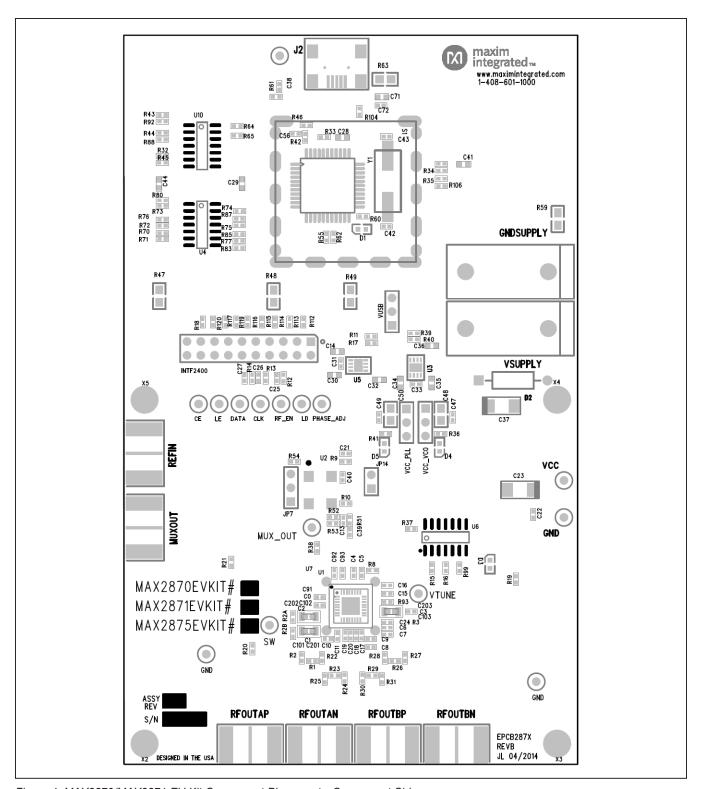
MAX2870/MAX2871 EV Kit Component Placement—Component Side
